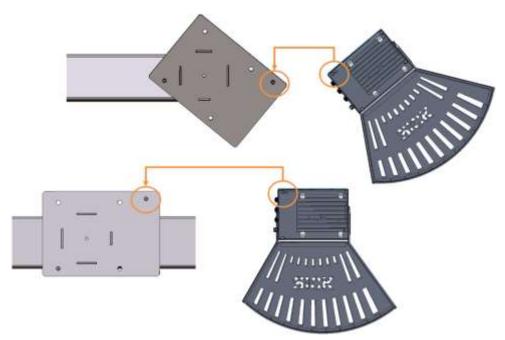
Fastening the 2D LiDAR sensors to the mounting plates
